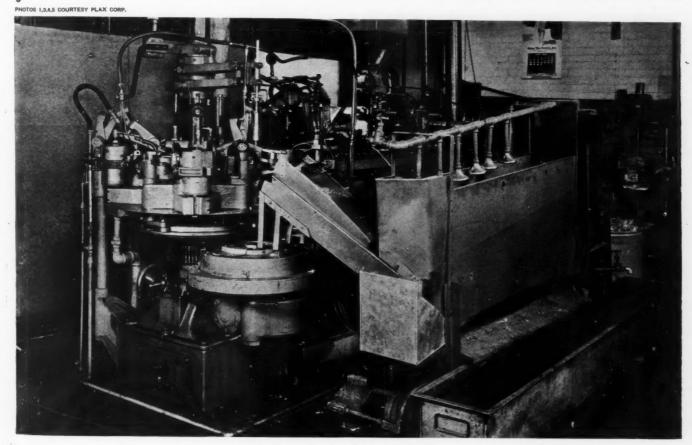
is a side view of the blowing machine, showing its general construction. The rotating table mounting the four blow molds is at left center, while a special set-up for cooling the parts stands at the right. In this cooling unit, spray nozzles mounted directly above a moving belt serve to cool the articles as they are carried away from the delivery end of the machine. The heating and extruding section of the equipment is in the left background, parallel to the cooling chamber.
